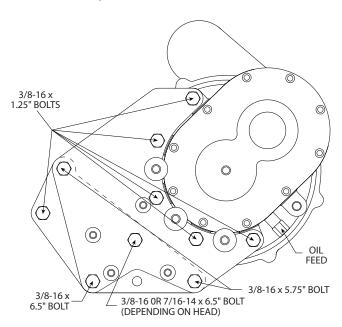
d / Driver side supercharger mount. ('69 Mustang)
